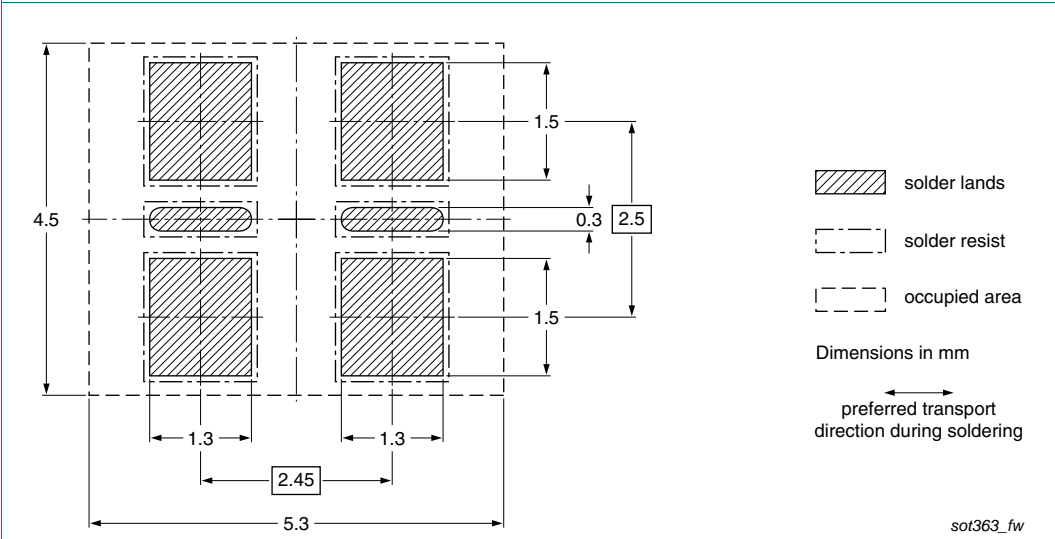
Wave soldering footprint BAV99S (SOT363/SC-88)
